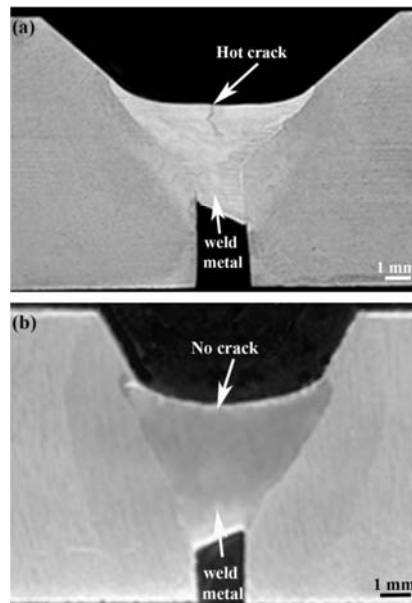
Cross-section after the Fisco hot crack test for welded samples (a) FCAW (b) Super-TIG
